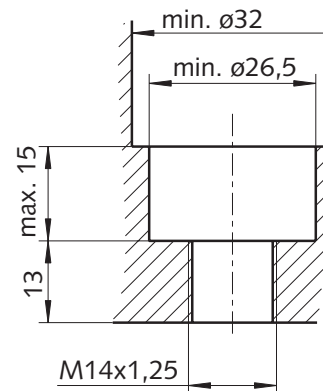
Mounting bore for the cooled switching adapter Type 7533A1
